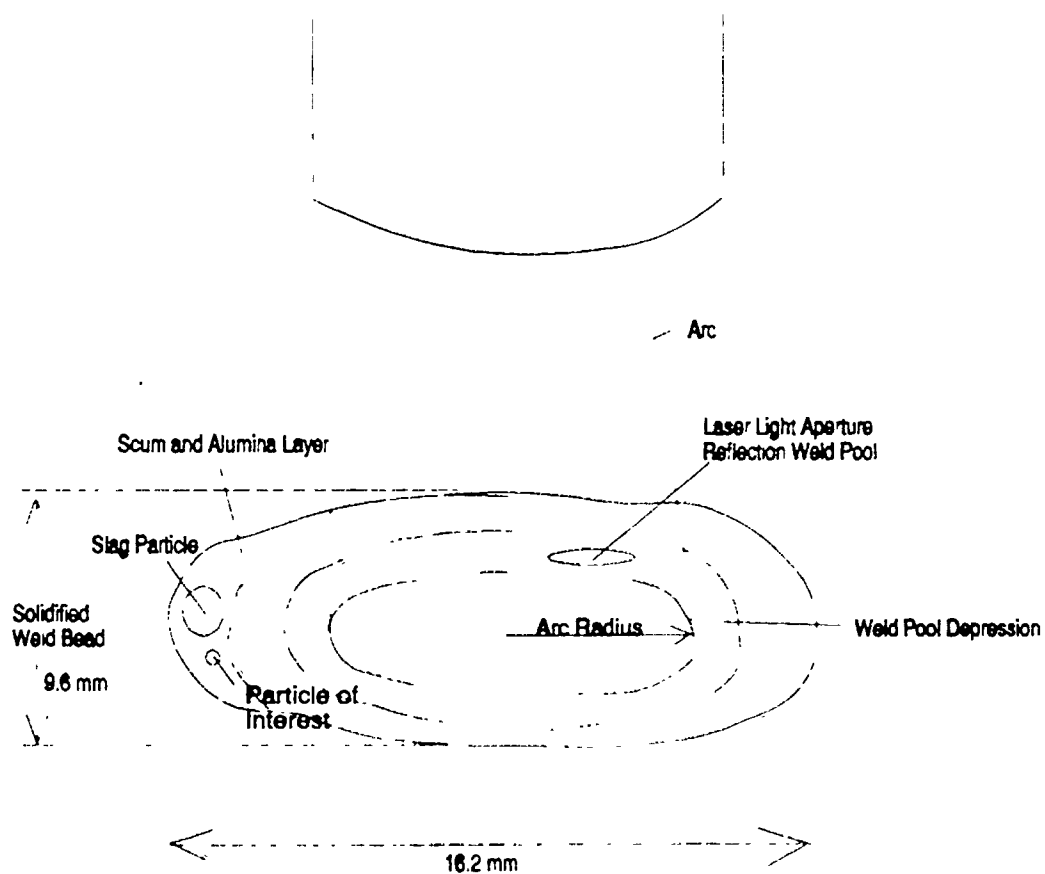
Weld Pool Flow. Time + .04 Seconds, 250 A, 14.2 v, Welding Speed 2.27 mm/sec. Enlargement x5.5.
